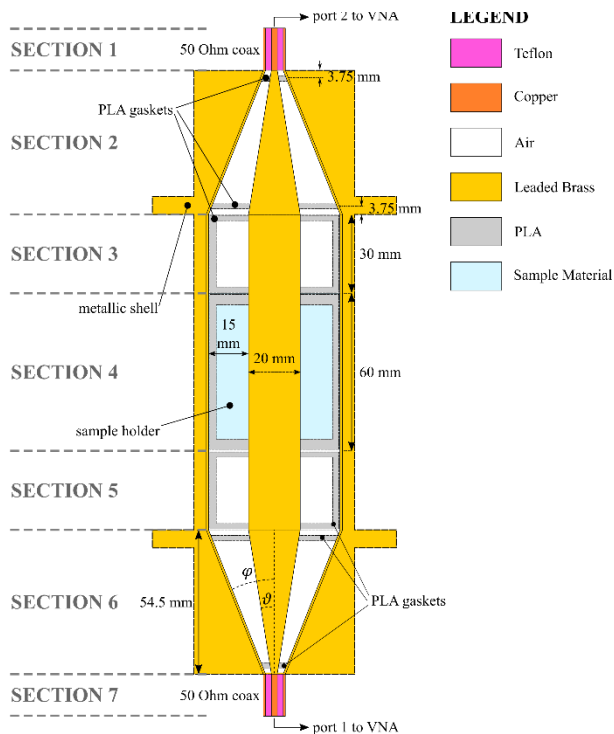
Dimensional drawing of the coaxial fixture, highlighting the sections and the materials.
